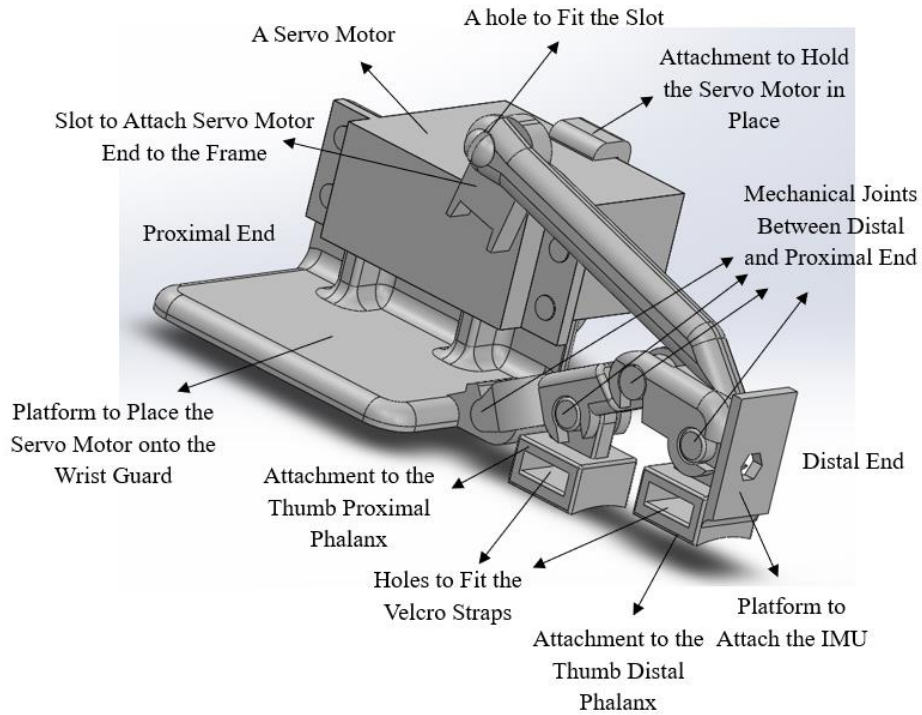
Drawing of Finalised Thumb Part in Isometric View.
